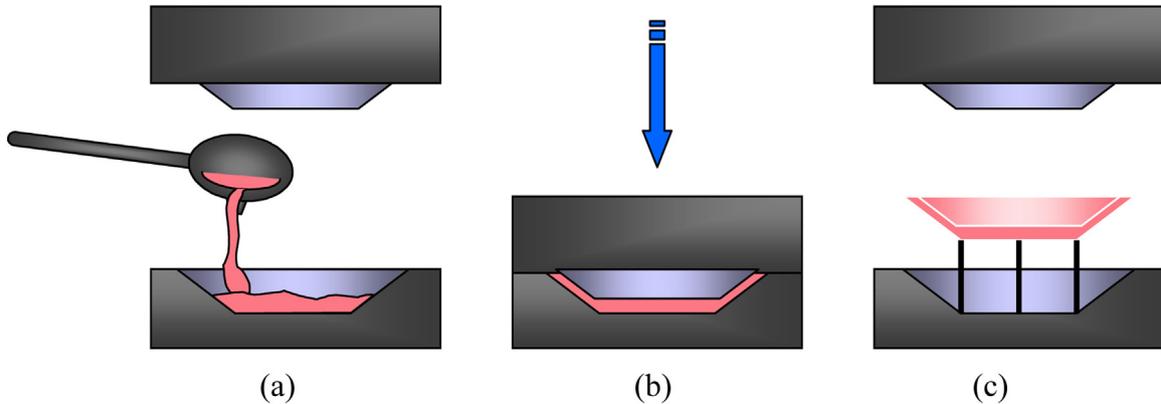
Schematic illustrating direct squeeze casting process operations: (a) melt into die cavity; (b) close tooling, solidify melt under pressure; and (c) eject casting [8].
